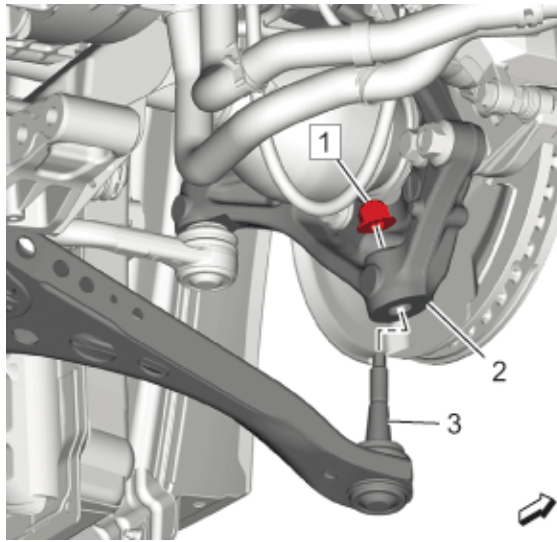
Steering Knuckle, Lower Ball Joint And Nut
